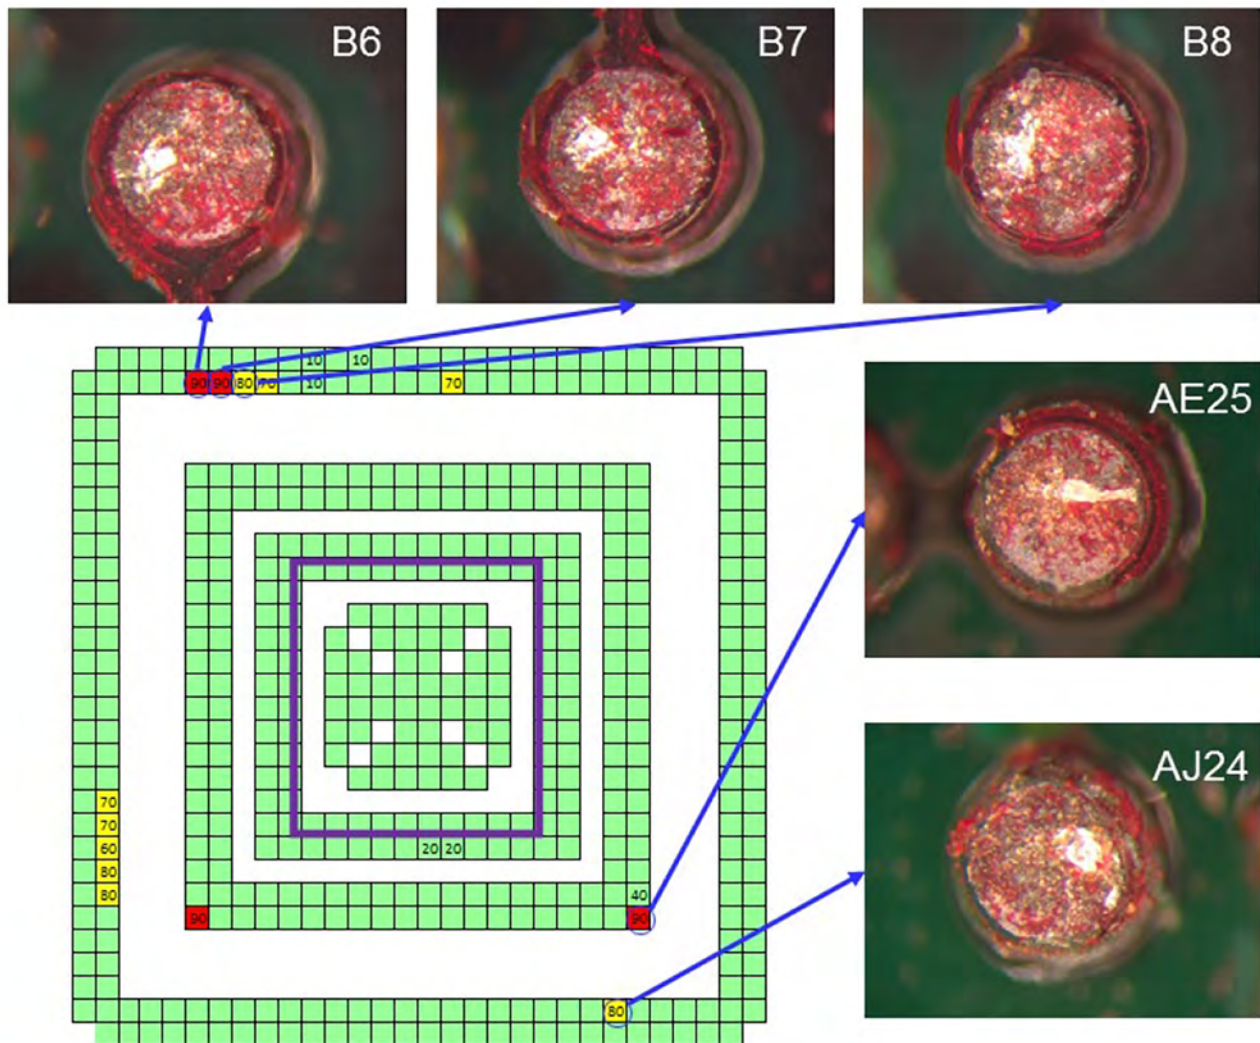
Example dye-and-pry results after 4,013 cycles from cell 1. Images are PCB view, on top of BGA ball attached to PCB pad after pry. Fracture surfaces were between solder ball and package BGA pad. Red area was fractured during cycling. Shiny area was still intact.
